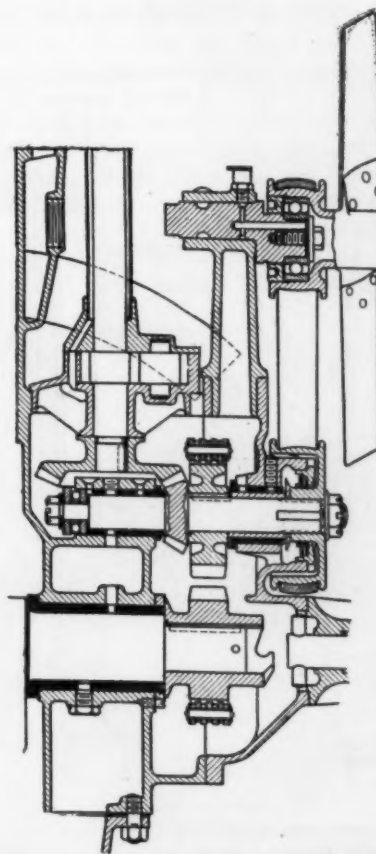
OVERHEAD CAMSHAFT DRIVE ON THE WOLSELEY ENGINE
